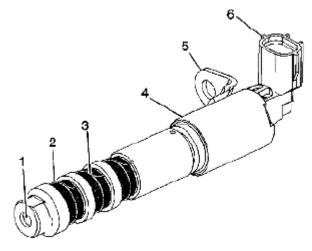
Inspecting Back Of Right Intake Camshaft Position Actuators Courtesy of SUZUKI OF AMERICA CORP.
